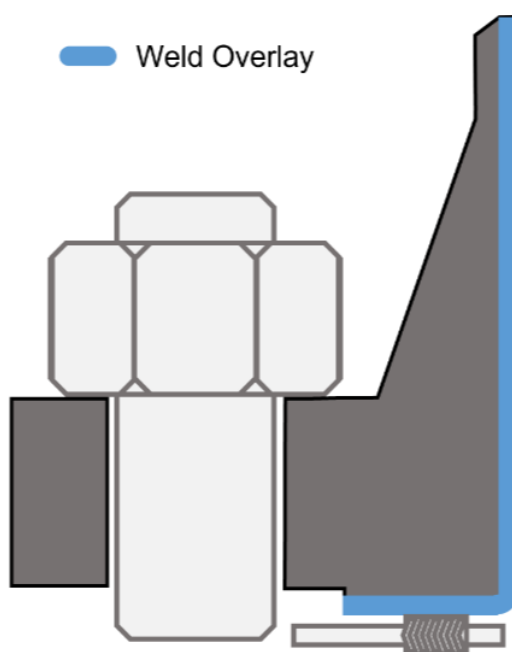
Equipment with internal weld overlay and RF flange
